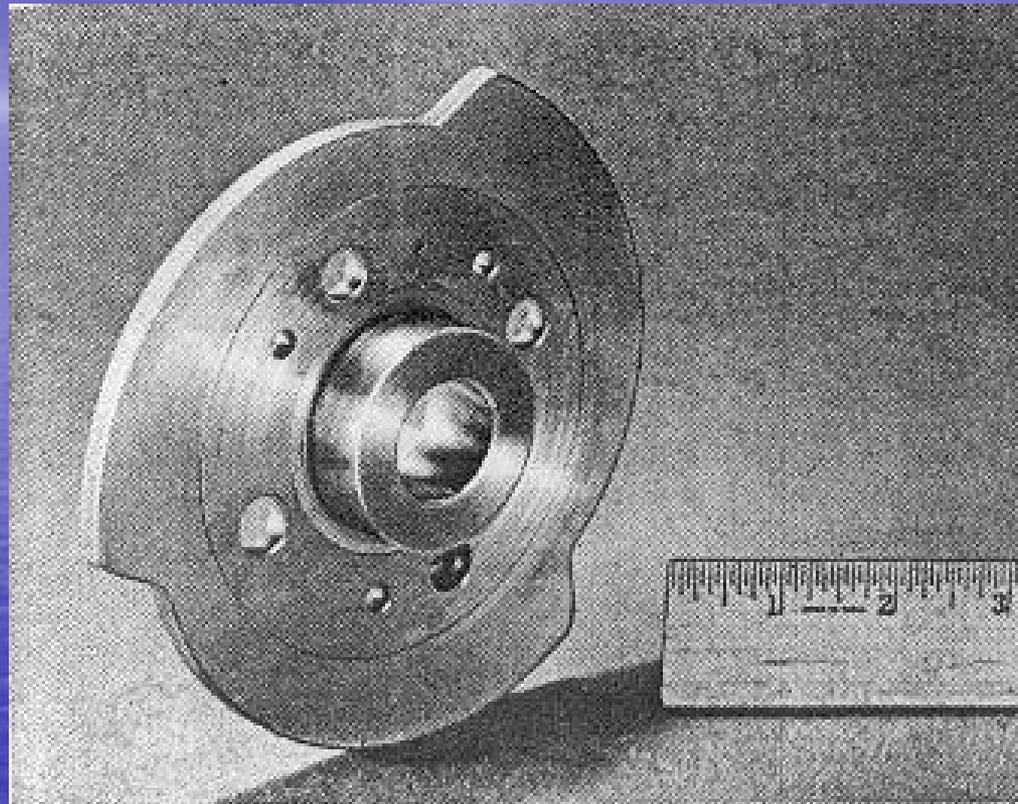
Control cam profiled by ECM after hardening, with repeatable accuracy within .001 in. (Courtesy, Anocut Engineering Company)
